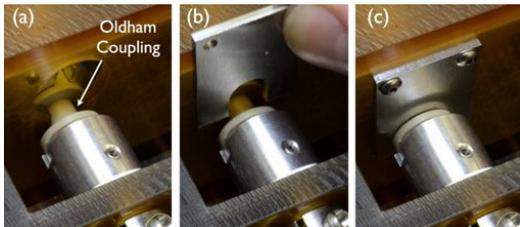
An Oldham coupling is used to transfer rotation of the motor shaft through a tortuous path to the sterile lead screws and square shaft for translation and rotation of the cannula tubes. (a) Oldham coupling made from PEEK plastic. (b) An aluminum plate is brought down over the Oldham coupling and secured in place. (c) The aluminum plate creates the tortuous path between the non-sterile bagged motor pack and the sterile robot.
